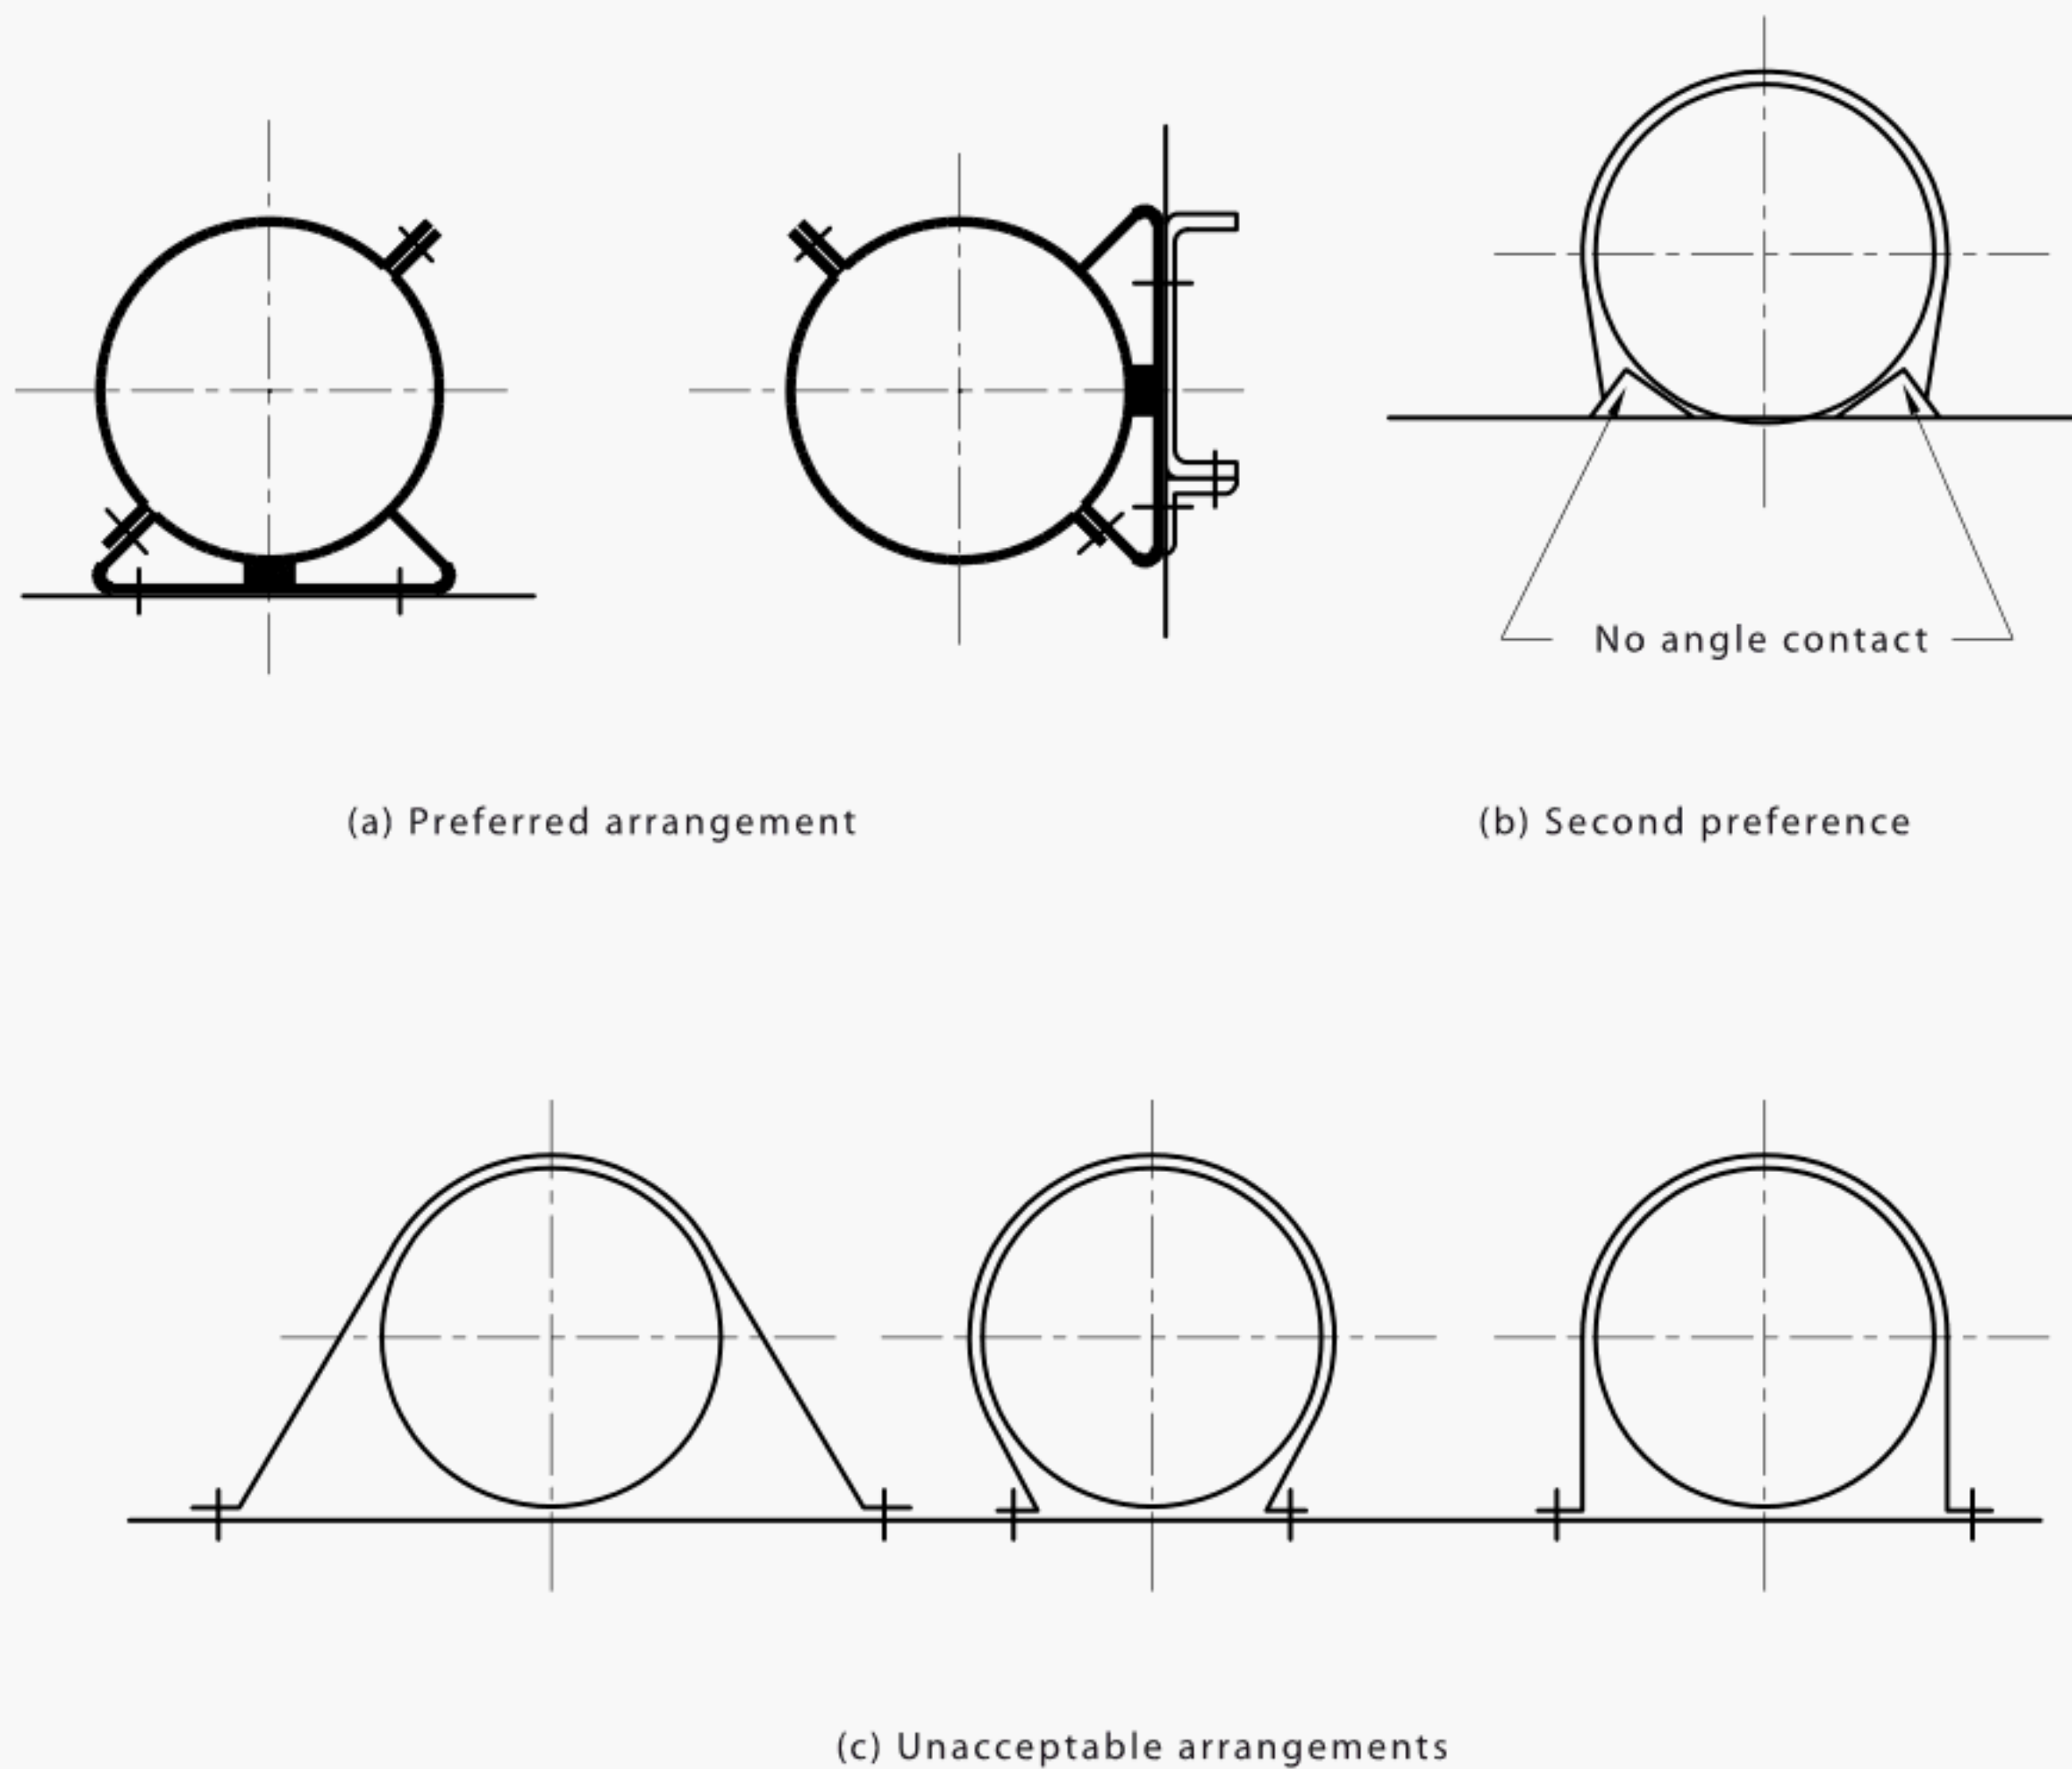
FUEL CONTAINER MOUNTINGS
